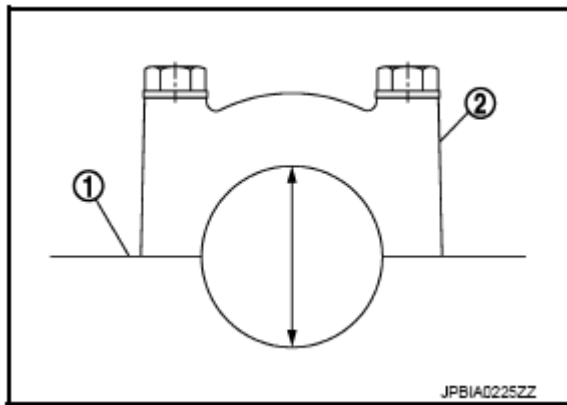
Identifying Main Bearing Housing Inner Diameter
